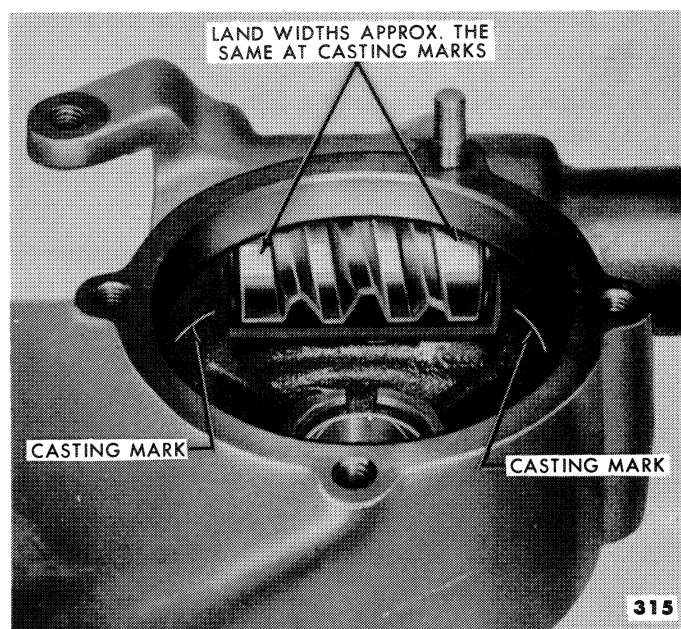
Positioning Worm and Shaft to the Straight-Ahead Position
